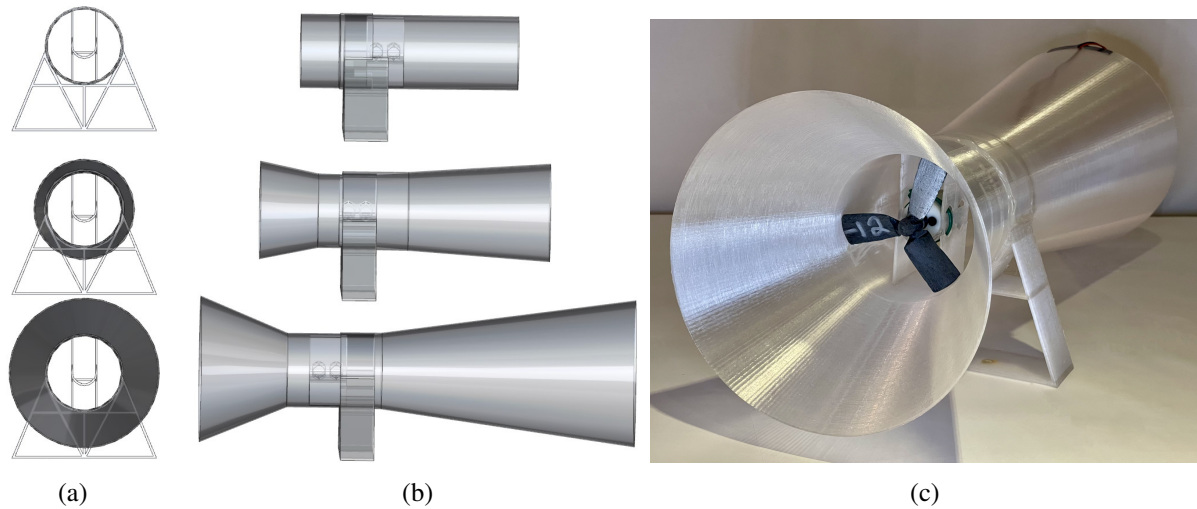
Final duct models and printed assembly (a) Model front view (b) Model side view (c) Complete printed assembly featuring duct with  $CR=0.5$  and pitch of  $-12^\circ$
